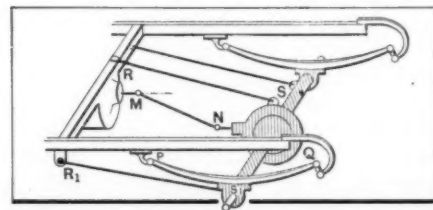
The displacement of the axle as shown in Fig. 16 be seen in this illustration and the method of attaching the distance rods. The spring perches are fitted solid to the axle casing
